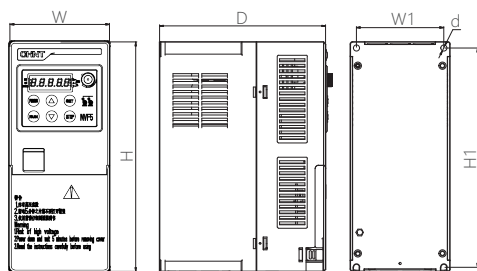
Outline and installation dimensional drawing of NVF5-3.7/TS4-B~NVF5-7.5/TS4-B,
